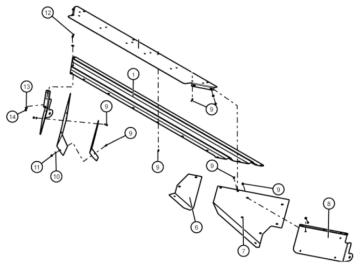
Forming Shield Assembly Refer to Parts Pages for Further Detail Note: Keys 6 and 25 are only used only with the 995 and 994 Platforms.
